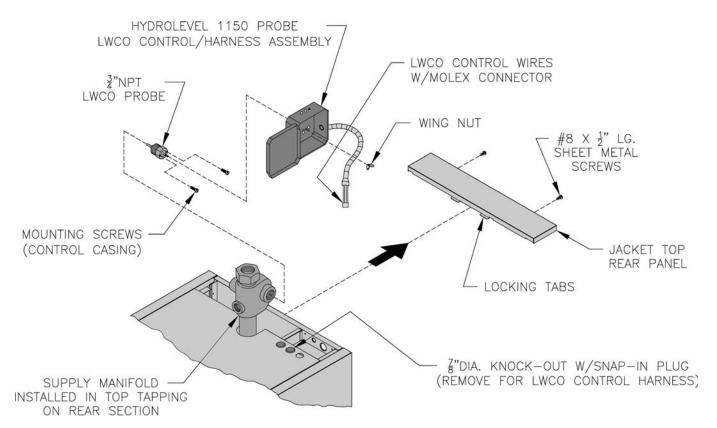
Optional Equipment - Low Water Cut-Off (LWCO) Control Assembly Details
